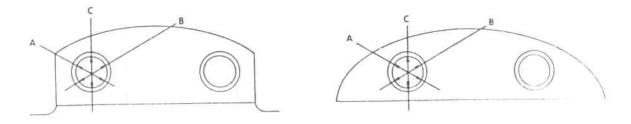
COUNTERWEIGHT BUSHING DIAMETER CHECK.
